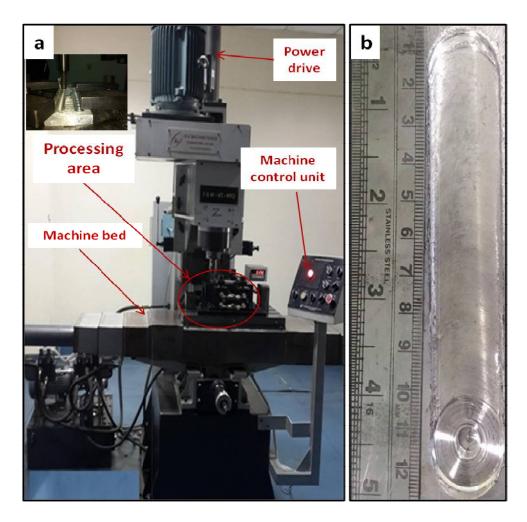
(a) FSW set up (R V machine tools, FSW-4T-HYD), (b) Surface appearance of the FSPed specimen
